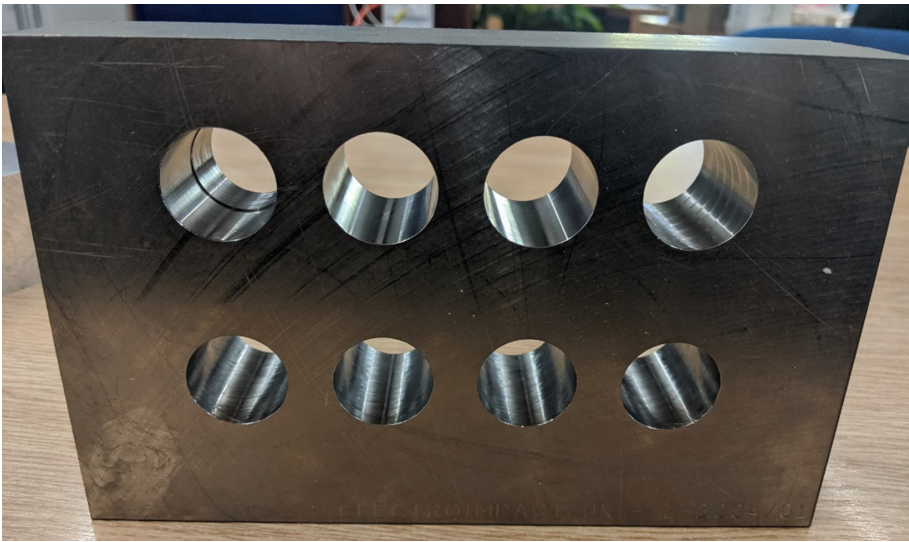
Production cutter coupon drill and ream holes (holes 1,2,3: One-shot drill 27.5 mm & Ream 28.5 mm, hole 4: Partial ream, holes 5,6,7,8: One-shot drill 27.5 mm)
